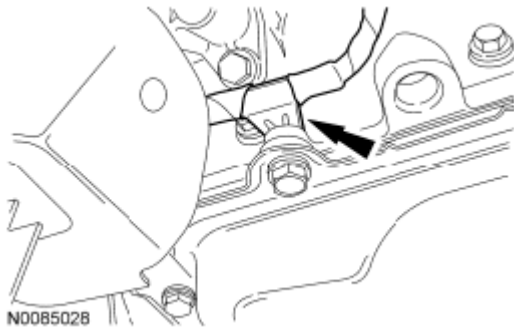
Locating Oil Pressure Switch Wiring Harness
